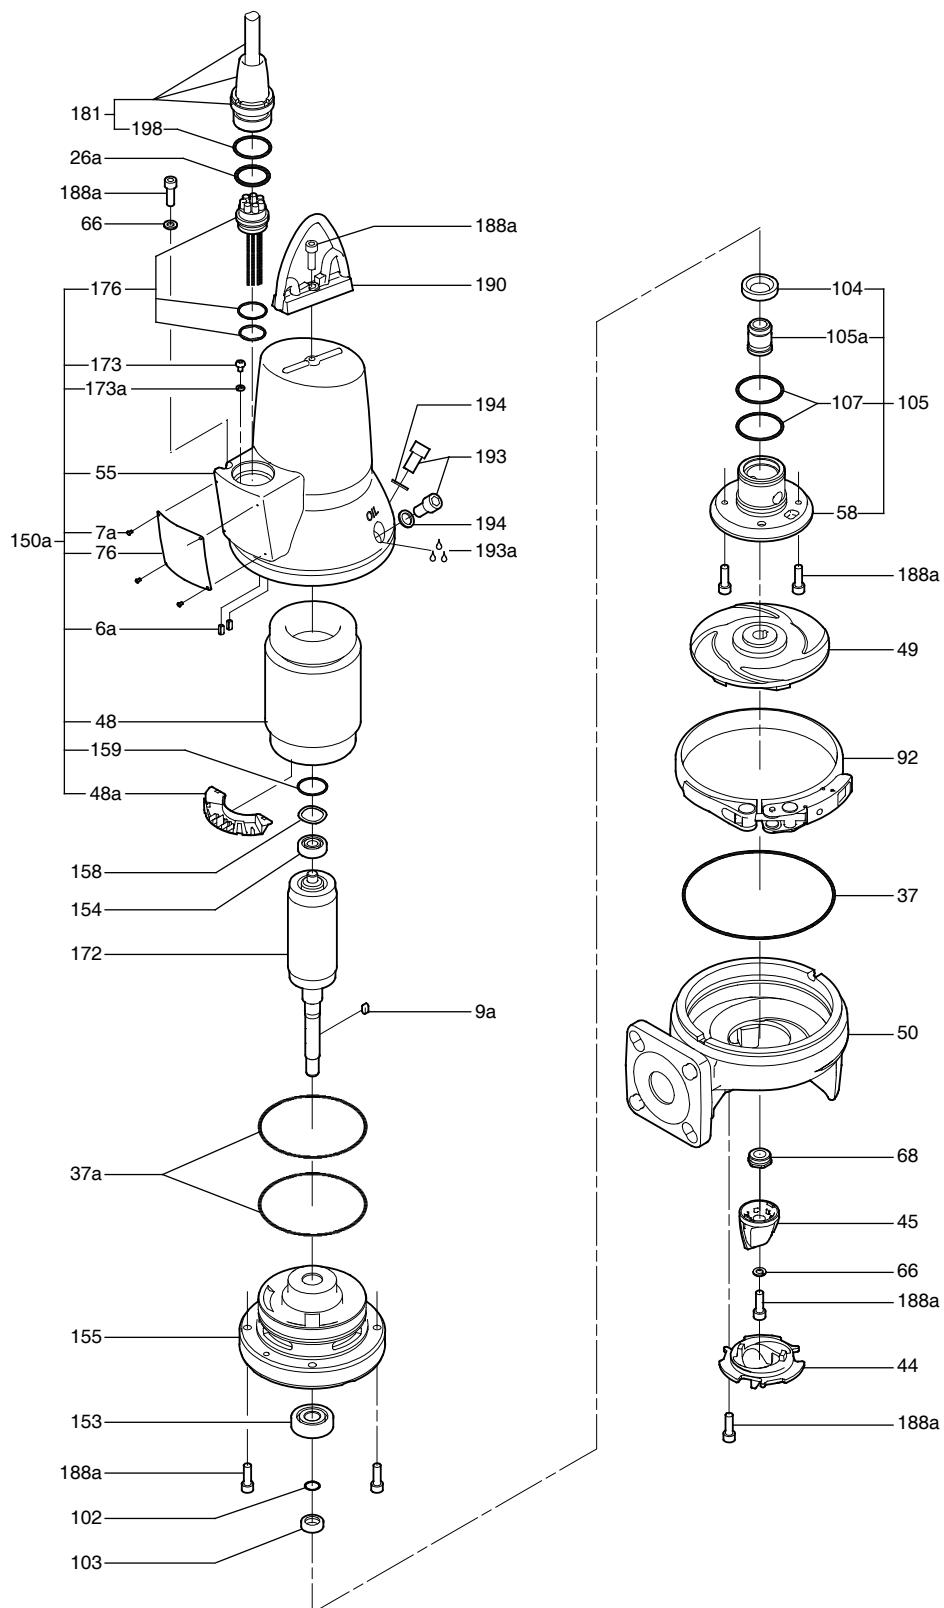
Exploded view of SEG pumps, 0.9, 1.2 and 1.5 kW
